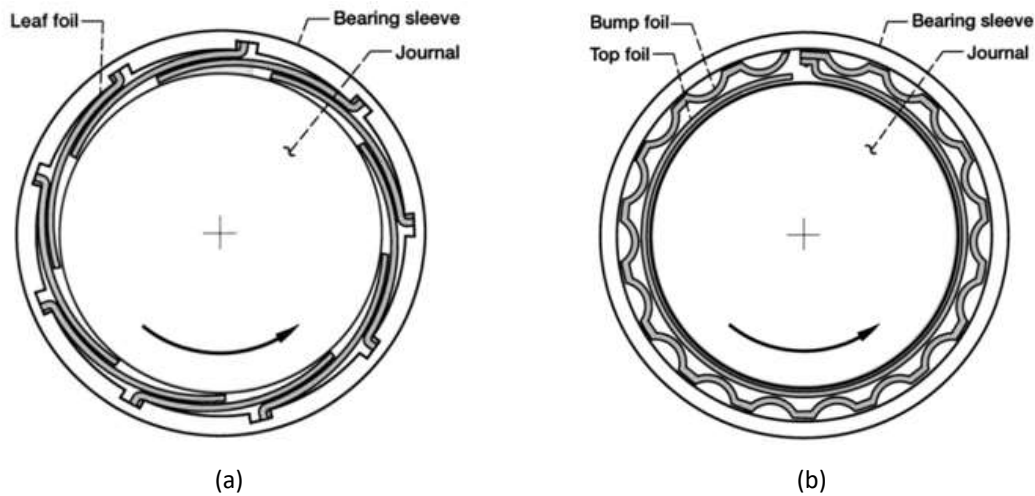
First generation foil bearings with axially and circumferentially uniform elastic support elements: (a) leaf-type foil bearing and (b) bump-type foil bearing, taken from [56]
